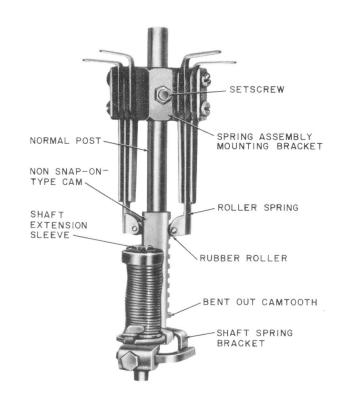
Normal Post Spring Assembly Having Rubber Rollers Operated by Nonsnap-on-Type Cam (Single Cam Illustrated)
